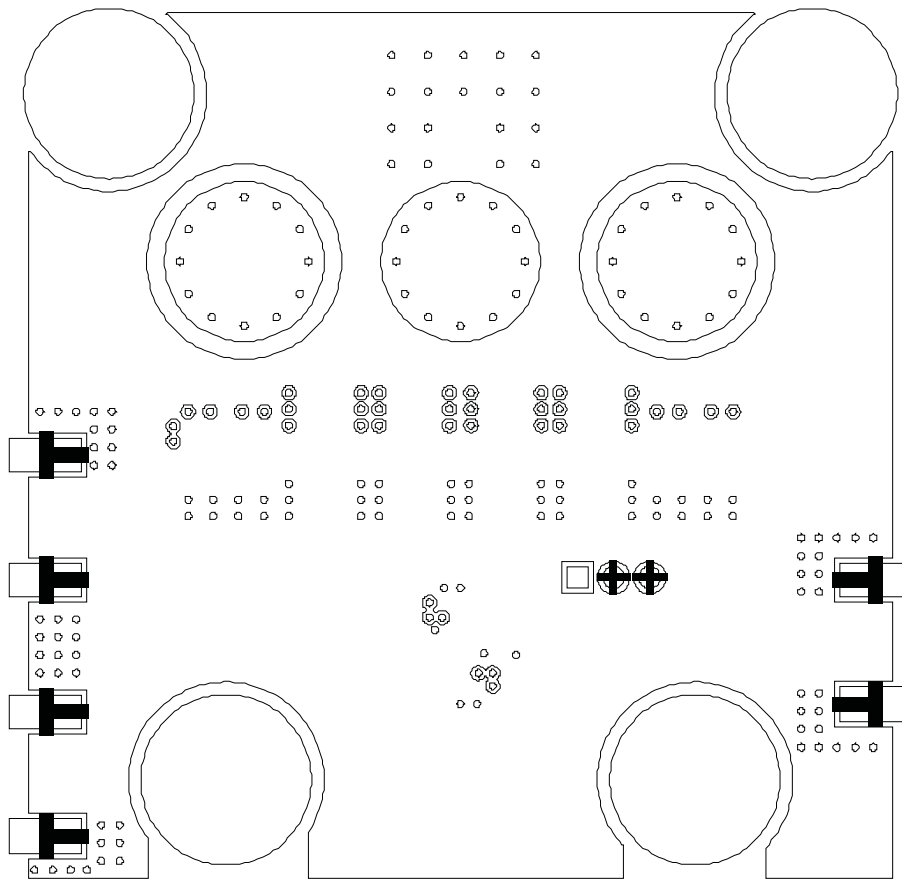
SN65LVDS4EVM Board Layout, Bottom – Layer 4
